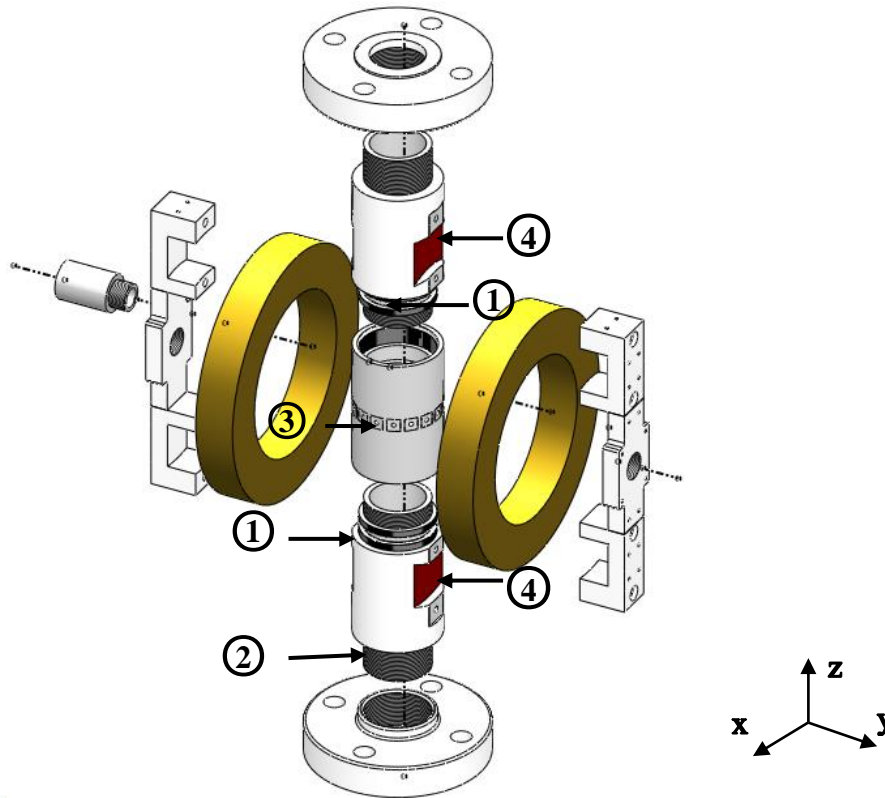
Component parts of the IFT device ① rubber O-Ring ② 2" BSP thread ③ electrodes holes
